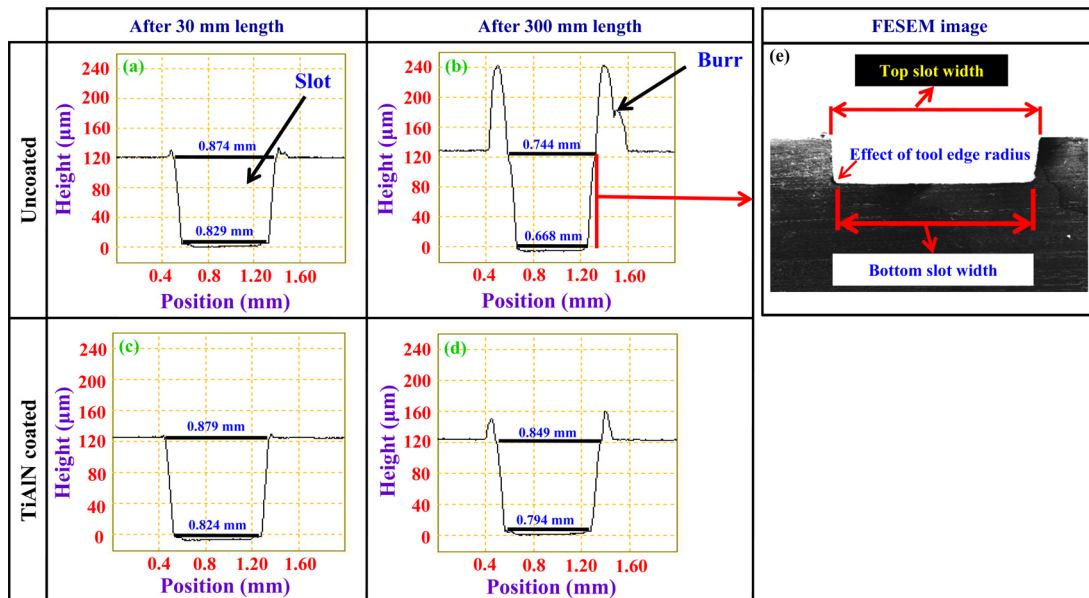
Variation of slot shape after slotting 30 and 300 mm machined lengths using: (a)-(b) uncoated tool and (c)-(d) TiAlN coated tool (e) FESEM image of slot shape for an uncoated tool after 300 mm machined length.
